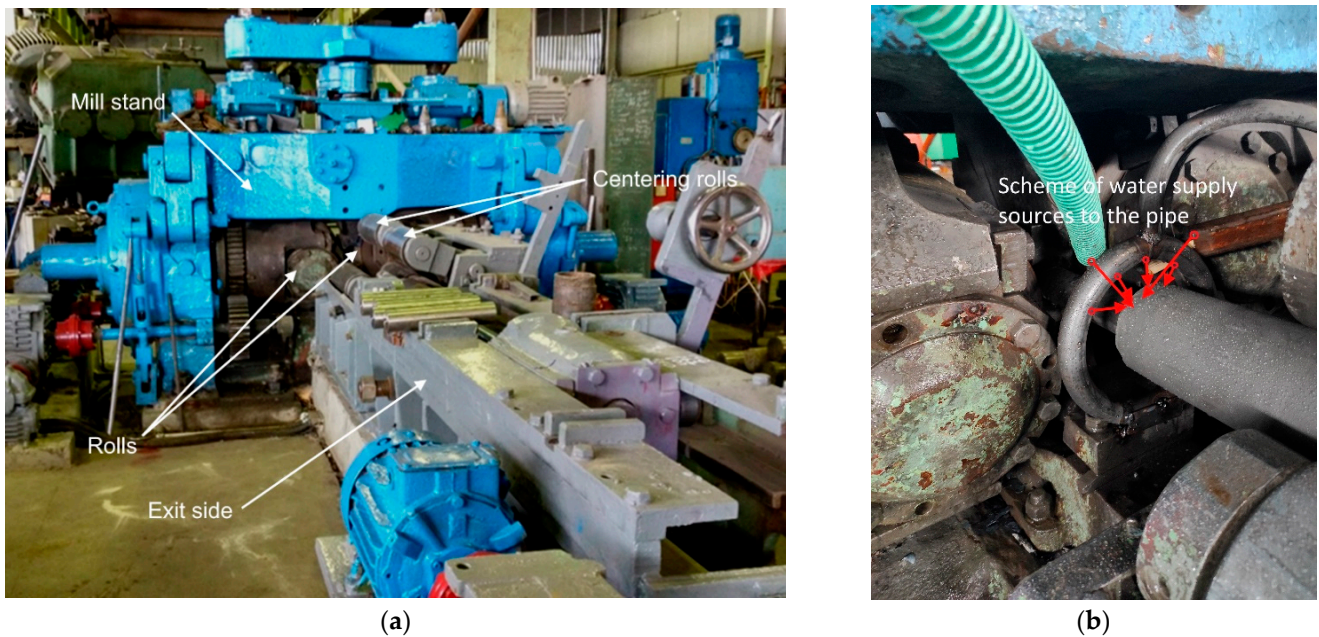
The rolling stand (view from the output side) of the (a) MISIS-130D piercing mill and (b) the cooling system.
